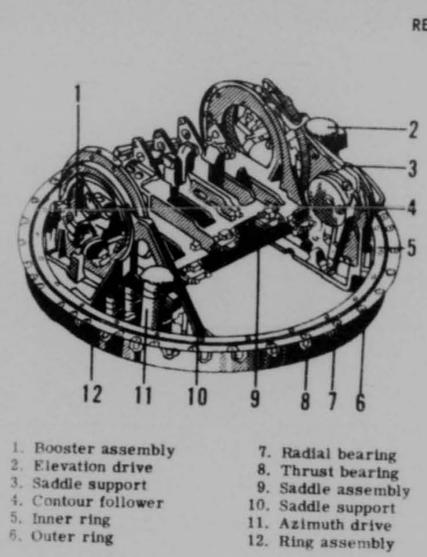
Ring Assembly Drives and Saddle Assembly.
